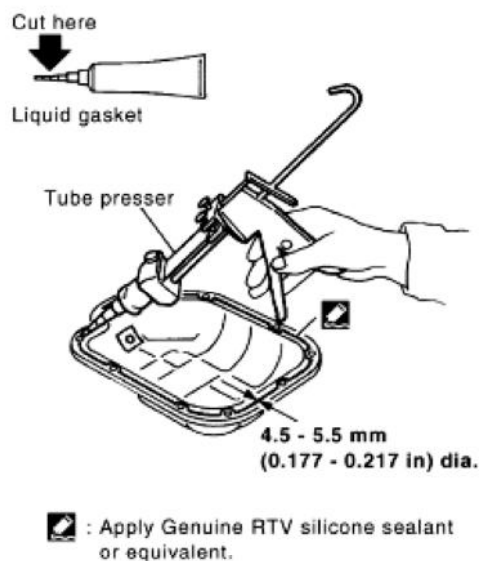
Applying Continuous Bead Of Liquid Gasket To Oil Pan (Lower)
